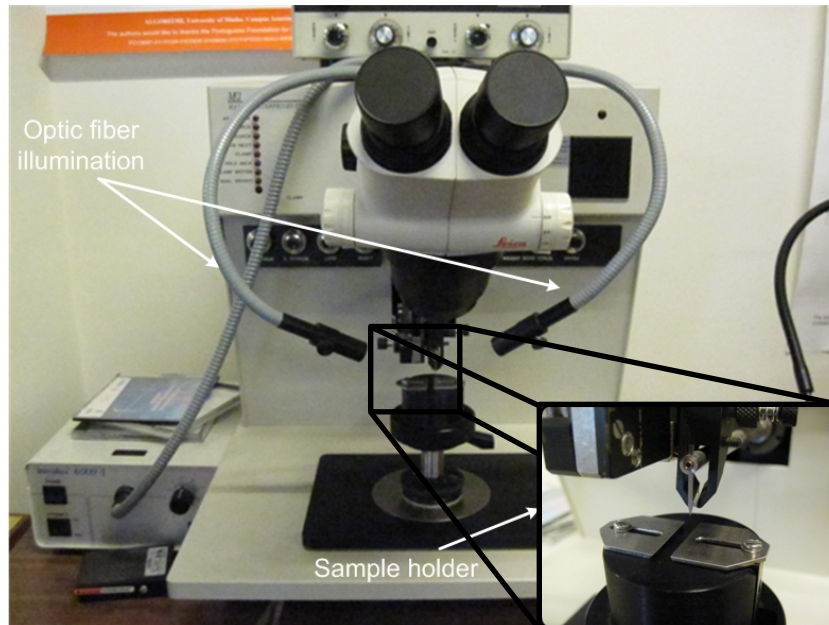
MEI 1204W Hybrid Wedge Bonder for performing the wire bonding between the die and PCB.
